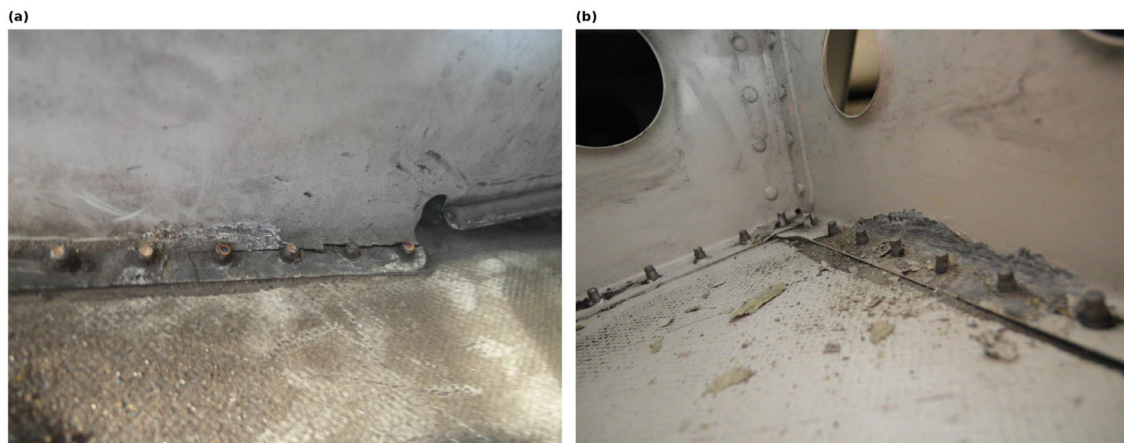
Field inspection evidence of corrosion in a hidden aircraft zone after prolonged persistence of corrosion-prone conditions. (a) Close-up view of corrosion damage developing along a riveted and lap-joint-type detail. (b) Wider view of corrosion products and degradation in a hidden structural zone. These photographs provide qualitative maintenance context for the proposed early-warning logic. They do not establish a direct one-to-one temporal or spatial correlation with the specific severe events recorded by Sensor sets 1 and 2 during the present campaign; rather, they show why persistent corrosion-prone conditions in closed zones should be treated as operationally important and followed, when justified, by localization and direct NDT/EC verification.
